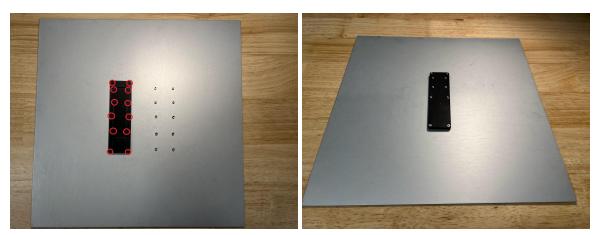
The locations for ten M2 2.9 mm depth inserts circled in red, and *Electronics Enclosure Bottom* with the inserts inserted
